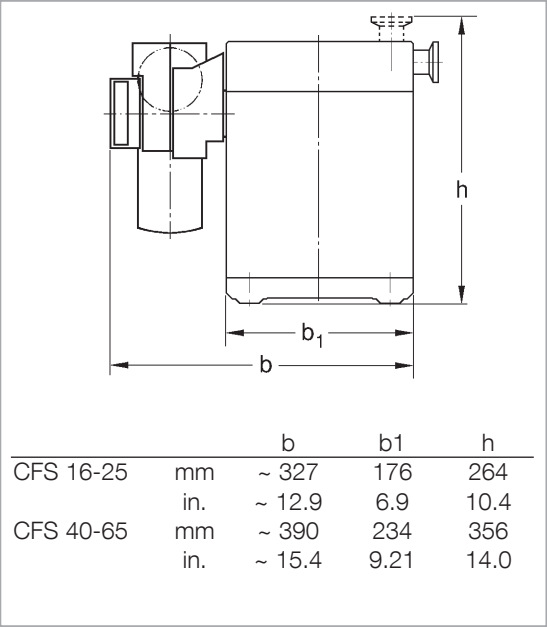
Dimensional drawing of CFS, dimensions in mm
